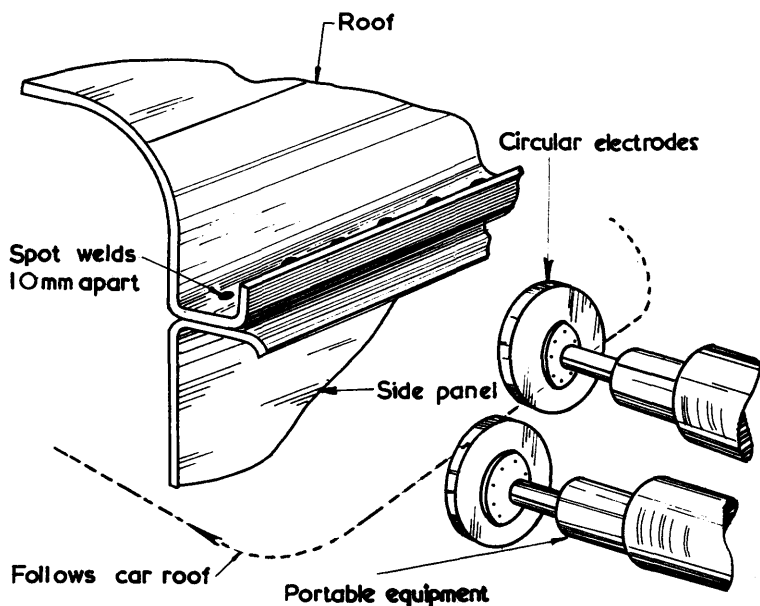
Stitch Welding Motor Car Roof.
